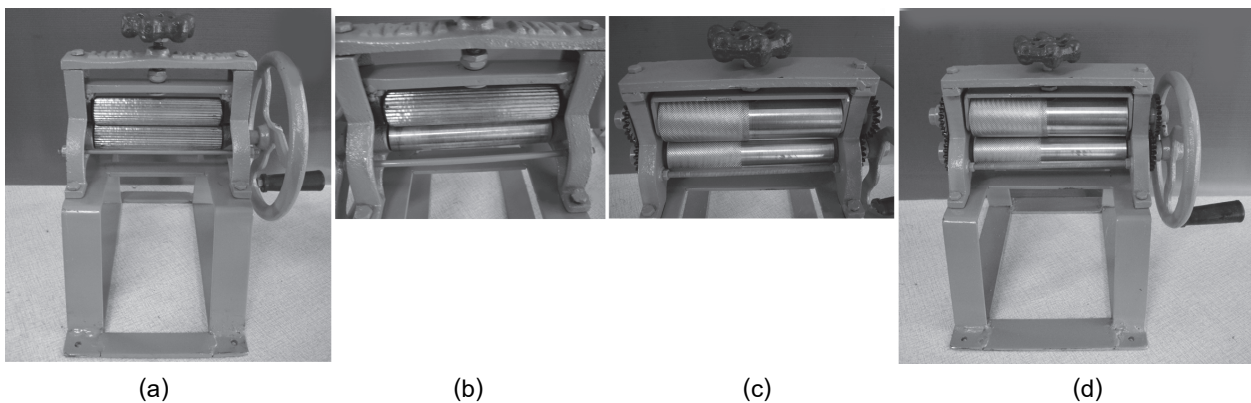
Modification of rubber calender process; (a) dried squid calender, (b) distance adjustable rollers, (c) driving and driven gears (d) rubber calendar shafts
